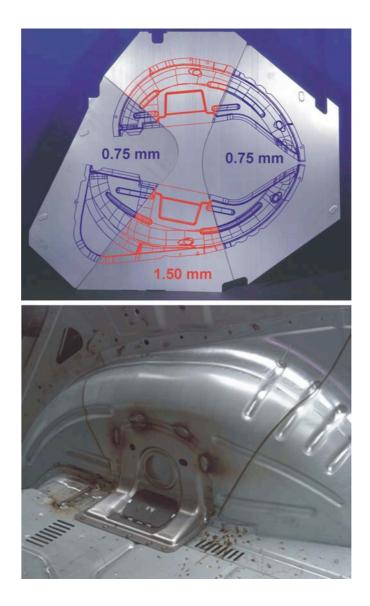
Non-linear welded wheelhouse panel of the Ford Mondeo Wagon
